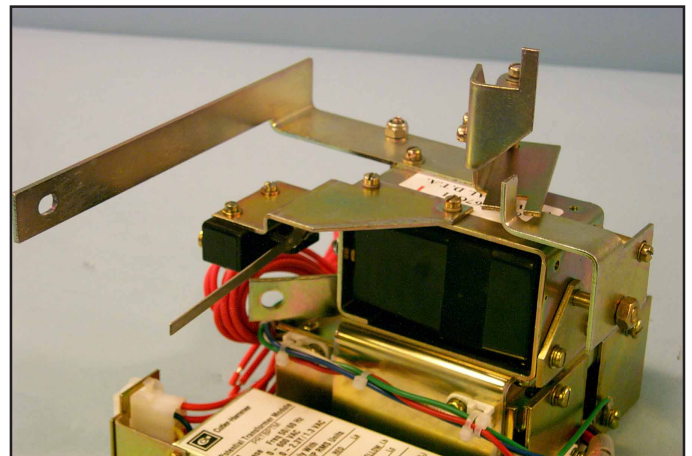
Auxiliary Switch Assembly Installed on the DTA Assembly.
